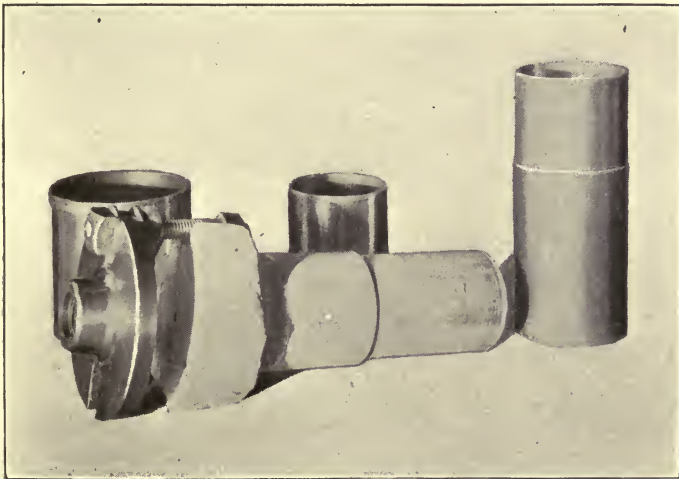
TUBING FOR WATER JACKET, CYLINDER AND PISTON SHELL, WITH HARD WOOD MANDREL.
